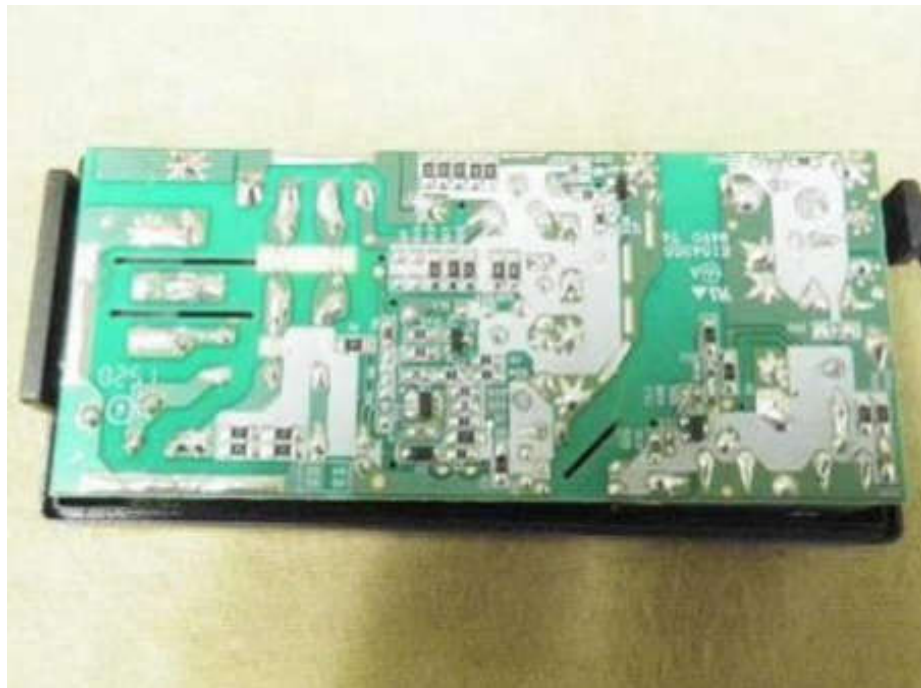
PCB trace side view of all unit (Fuse:F1 and F2)
